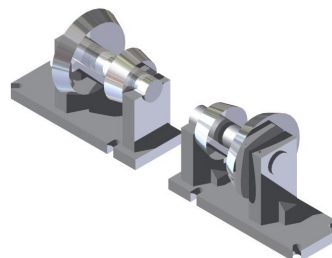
LARGE DIAMETER PIPE ROLLER SUPPORT STAND
